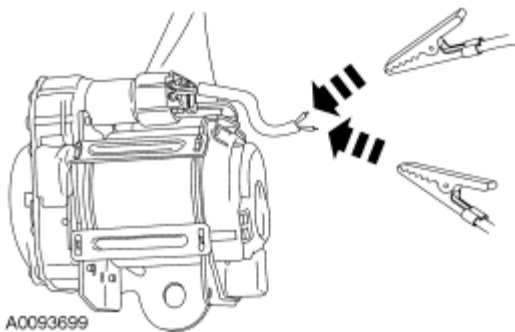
Attaching Jumper Wires To Safety Belt Retractor Pretensioner
